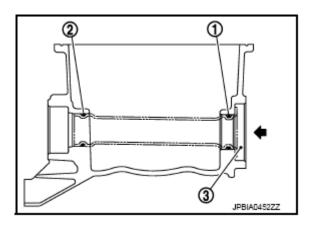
Identifying Axle Pipe And O-Rings Courtesy of NISSAN NORTH AMERICA, INC.
